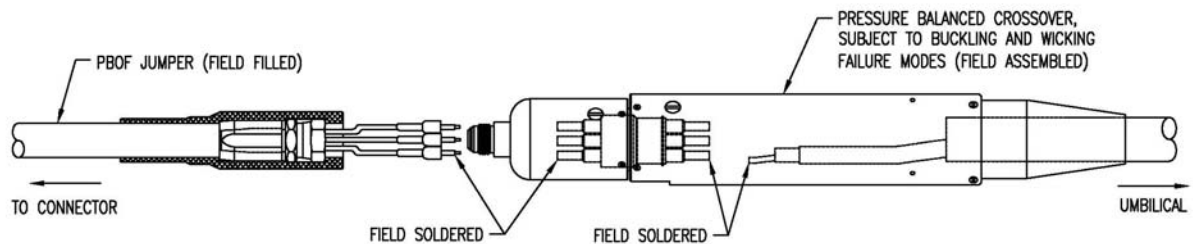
Standard Crossover Termination Requiring Field Assembly of Both the PBOF Jumper and the Crossover FITA
